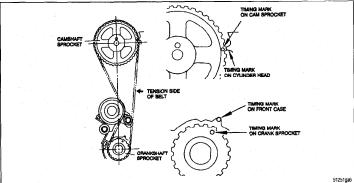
Camshaft and crankshaft sprocket mark alignment for proper timing belt installation-1990-94 1.5L engine
